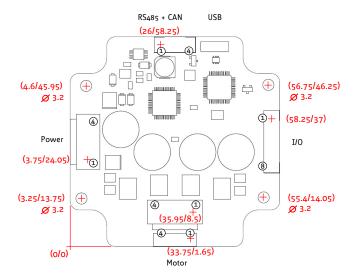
Board dimensions, position of mounting holes and position (pin 1) of connectors (all values in mm)
